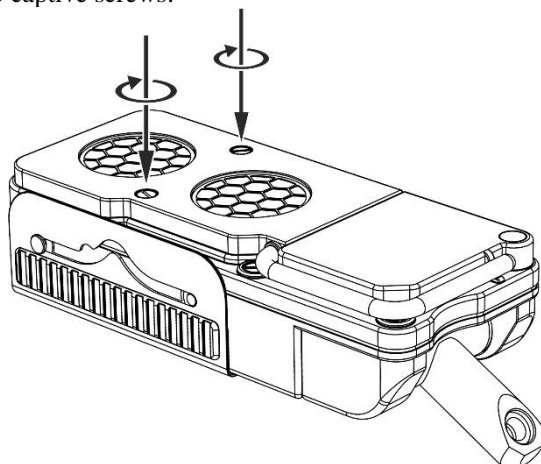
Final clamping of the protection cover to ABG probe's body
